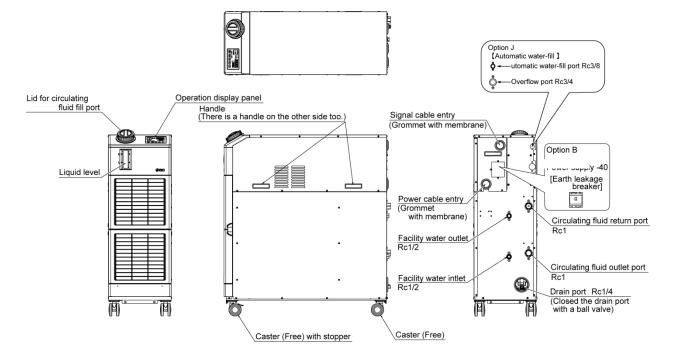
Names of the parts (This drawing shows "HRS090-A-20".)
